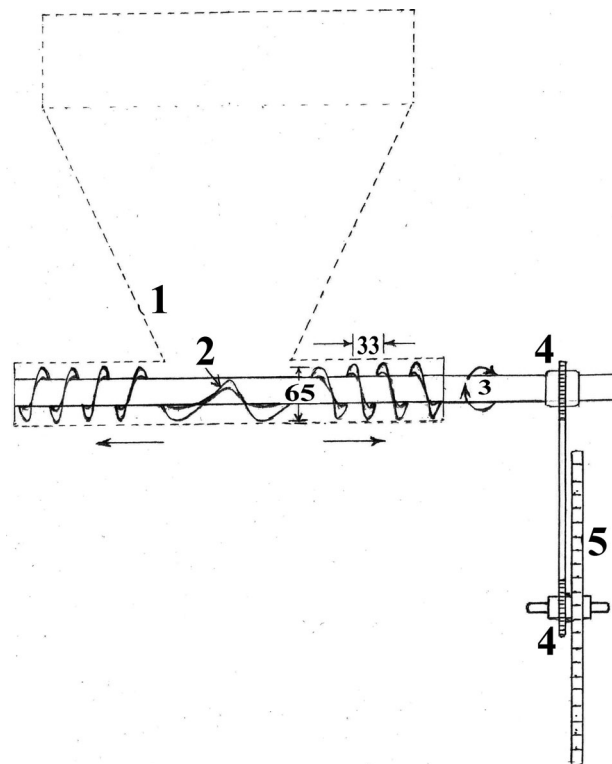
Schematic view of fertiliser metering. 1 Fertiliser box, 2 auger worm, 3 shaft, 4 chain sprockets (16 T), 5 ground wheel
